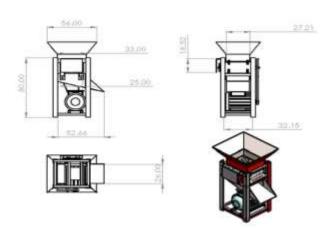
3D Full Assembled and Sectional Modelling the Shredder with Dimensions
